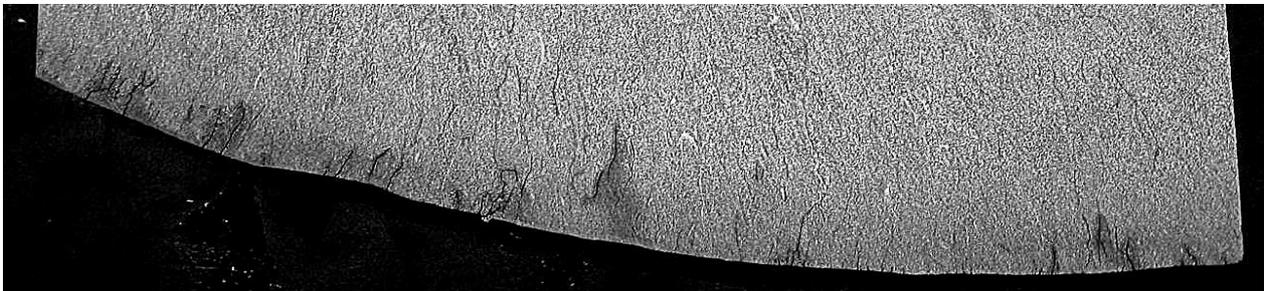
Surface and internal cracks in the cross-section of the bloom
